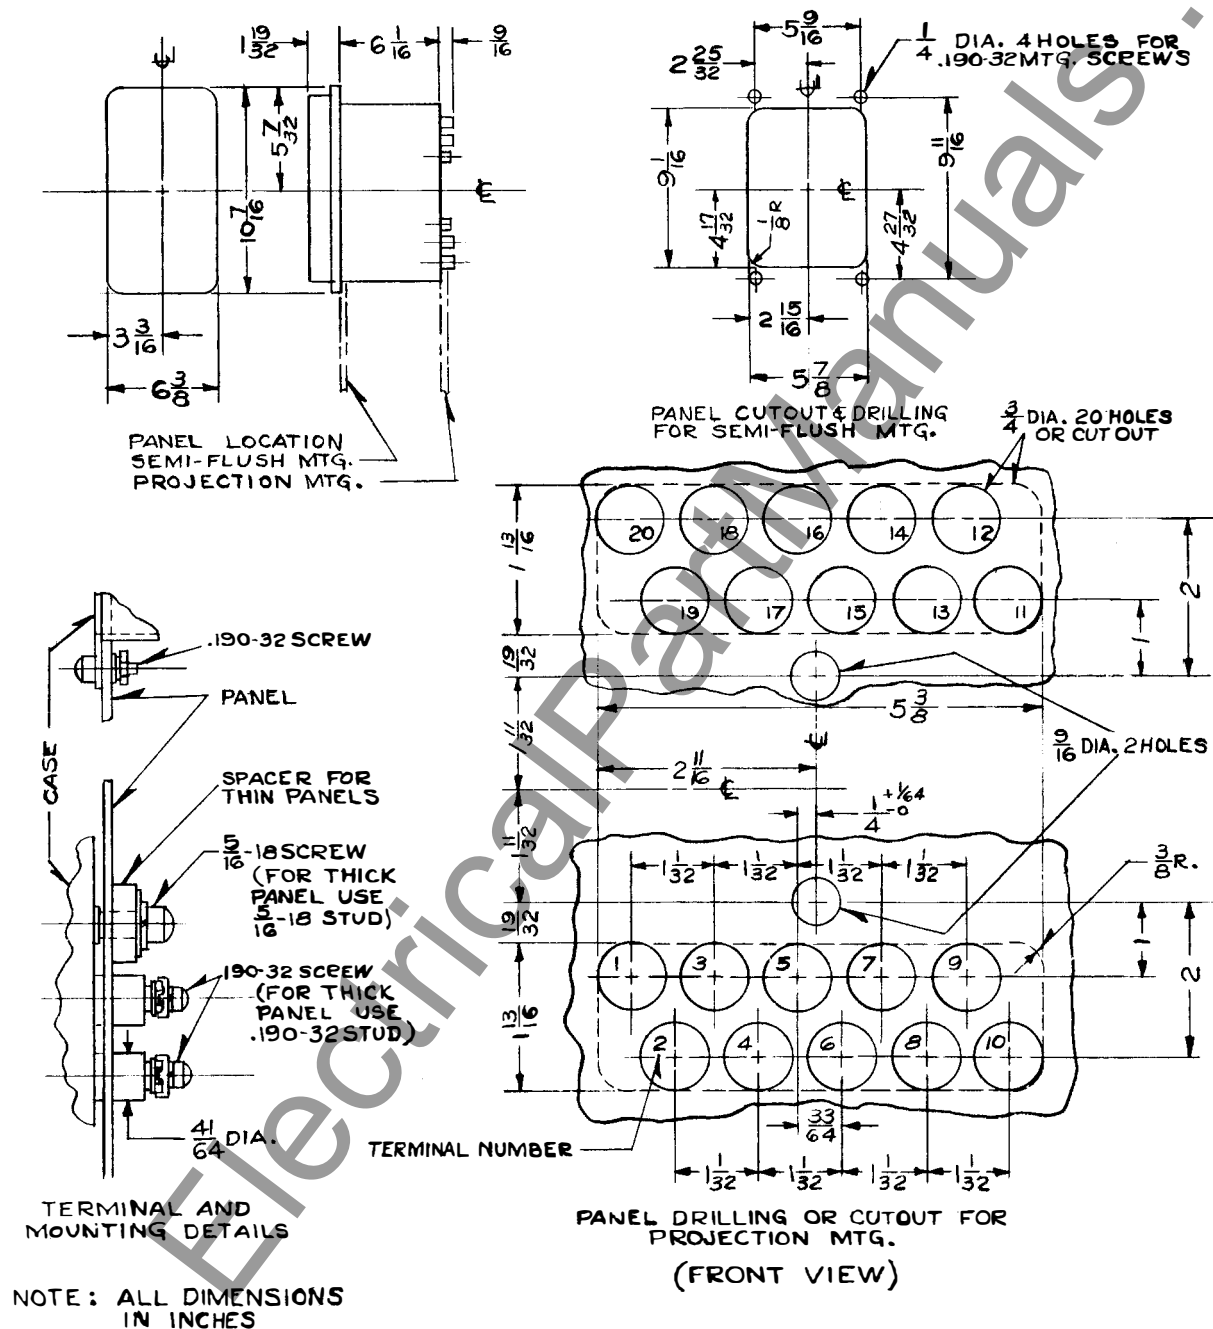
Outline and Drilling Plan for the Type FT22 Case
